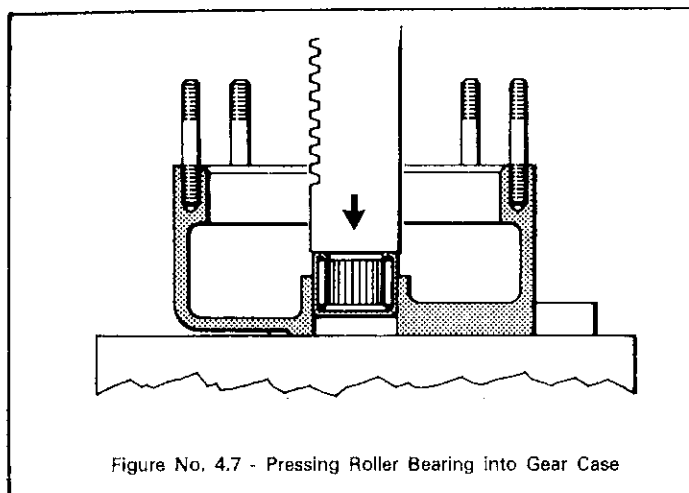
Pressing Roller Bearing into Gear Case
